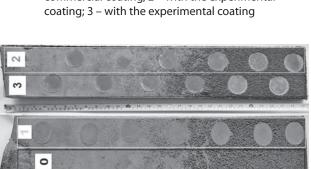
Casting of the pattern plate after being knocked-out – from the side of shaped samples
